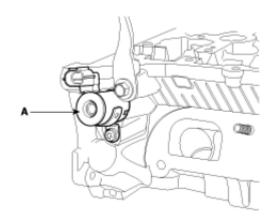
Identifying Intake OCV Courtesy of HYUNDAI MOTOR CO.
